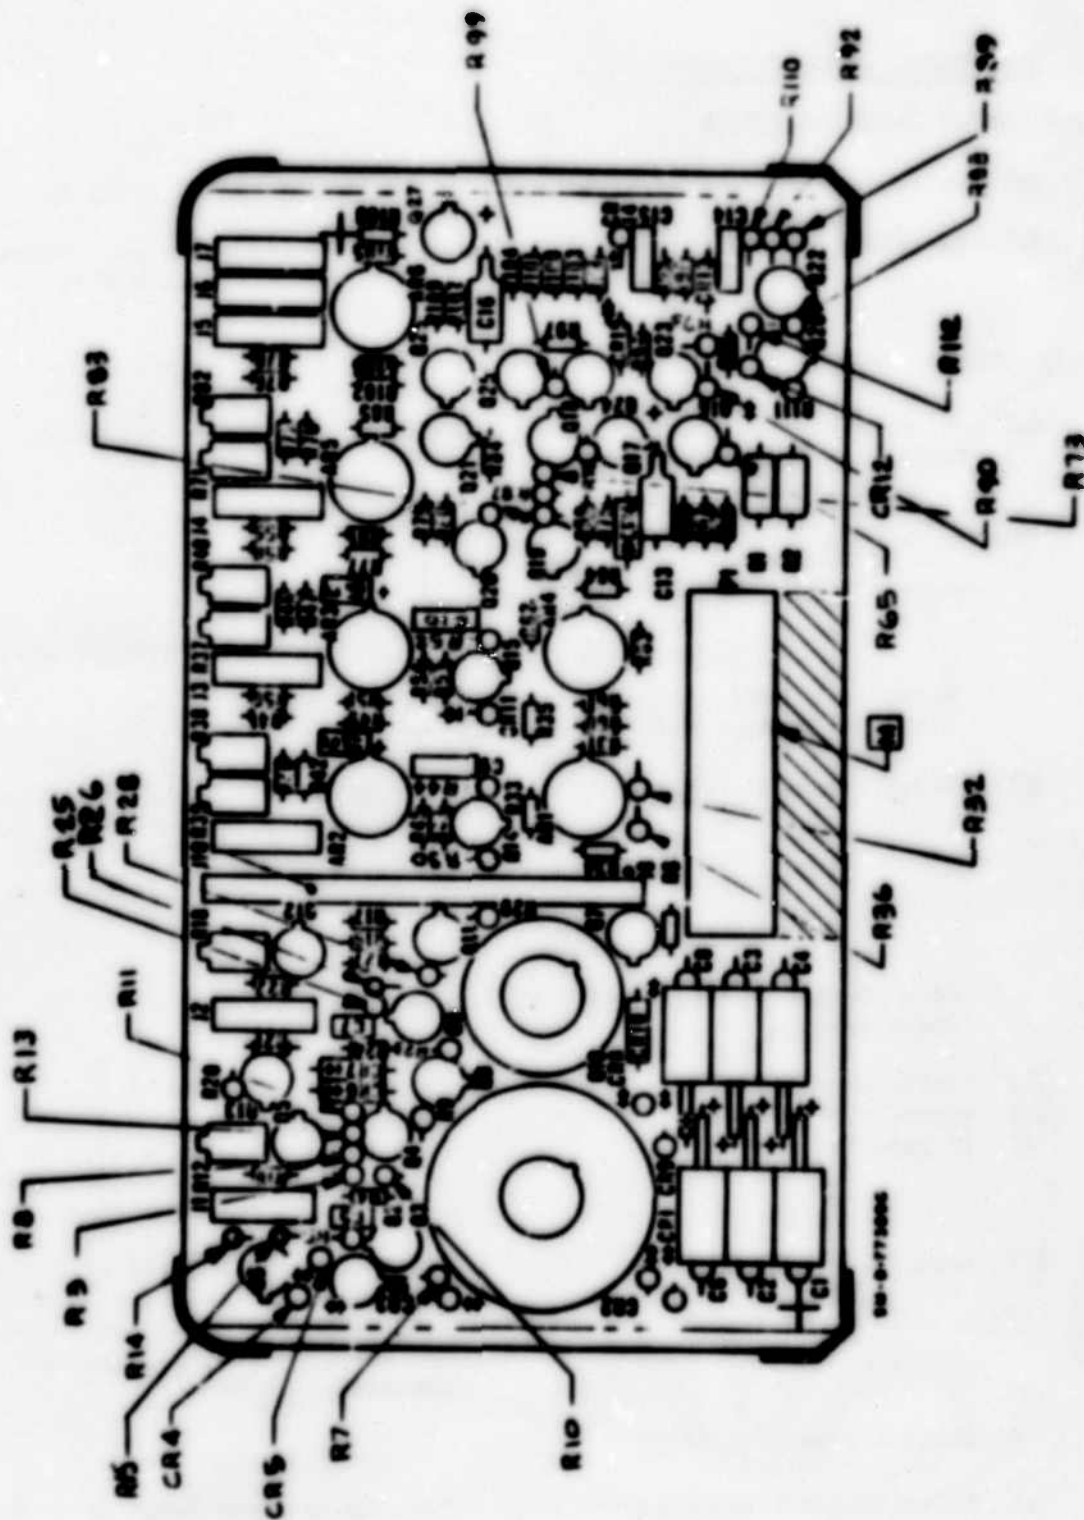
Auxiliary Control Module-Parts Location Drawing
